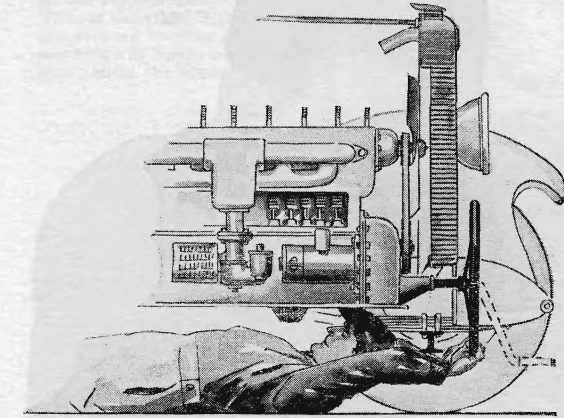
How to attach hand crank to old steering wheel and save time in adjusting connecting rod bearings.
